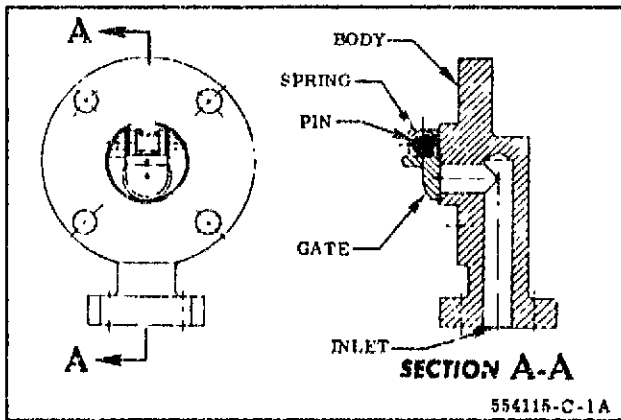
Oxidizer Dome Purge Check Valve--Cutaway View
